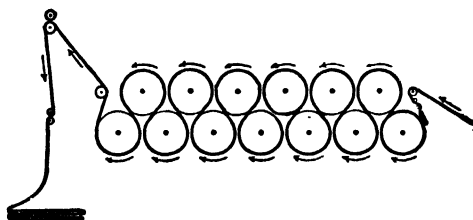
Diagram showing the Horizontal Drying Machine threaded with Cloth.
